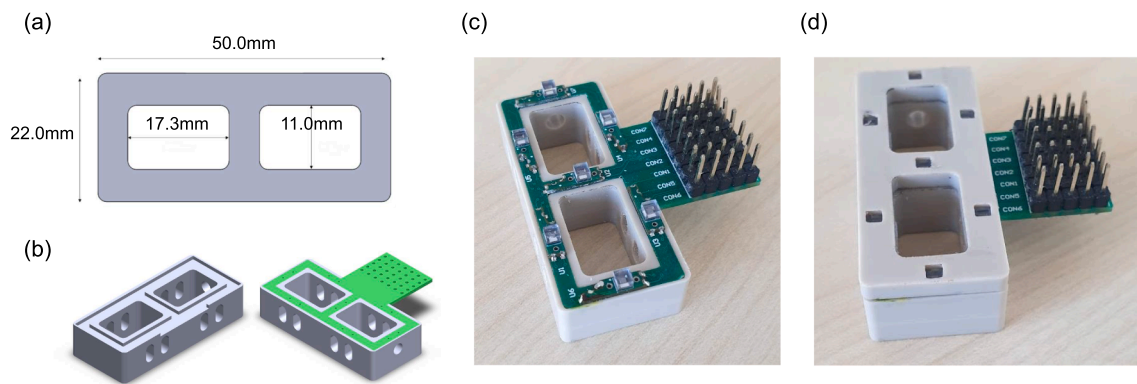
Interbody cage design and dimensions (a-b). Slots were machined in the cage to house and enclose the sensor-mounted PCB (c-d). 0.5 mm of room-temperature vulcanising silicone was applied on the sensor surfaces and levelled to the cage surface to protect the sensors from damage during loading.
